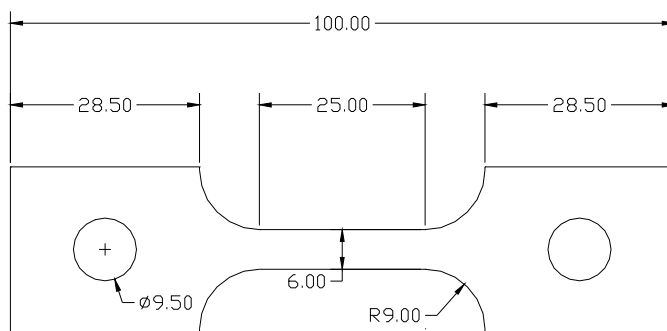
Thermo-mechanical fatigue specimen (dimensions in mm).
